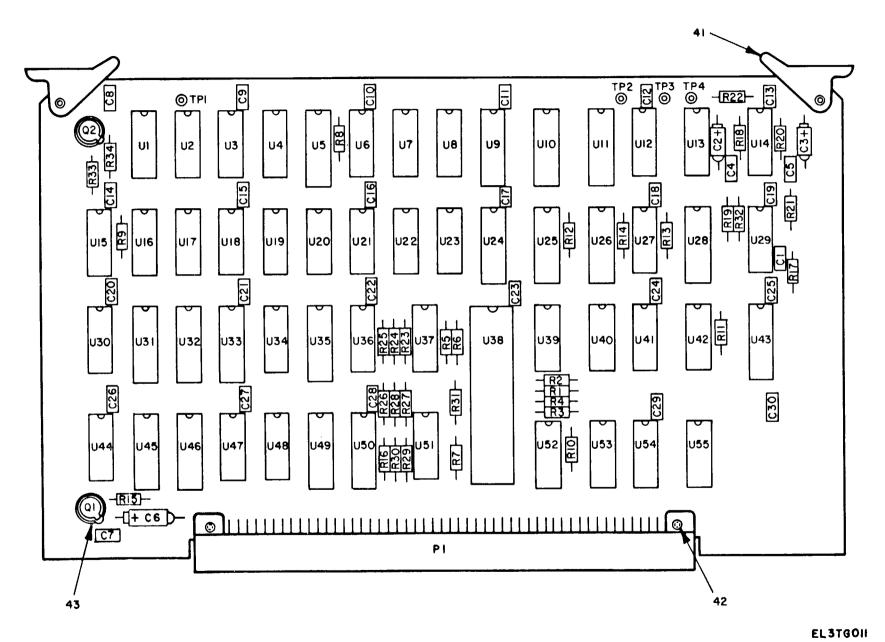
Circuit Card Assembly, Printer Control (3A1A4) (Sheet 1 of 2)
